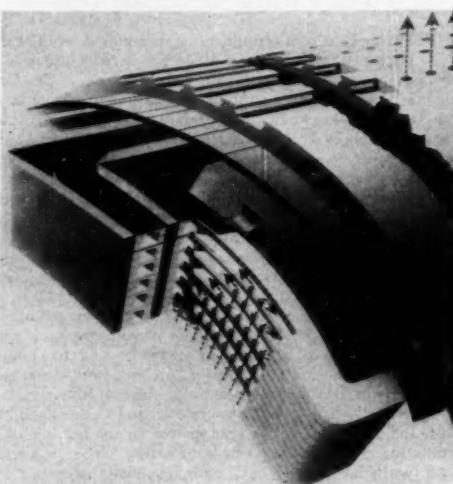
CUTAWAY VIEW OF A ROTOR AND ROTOR WINDING
